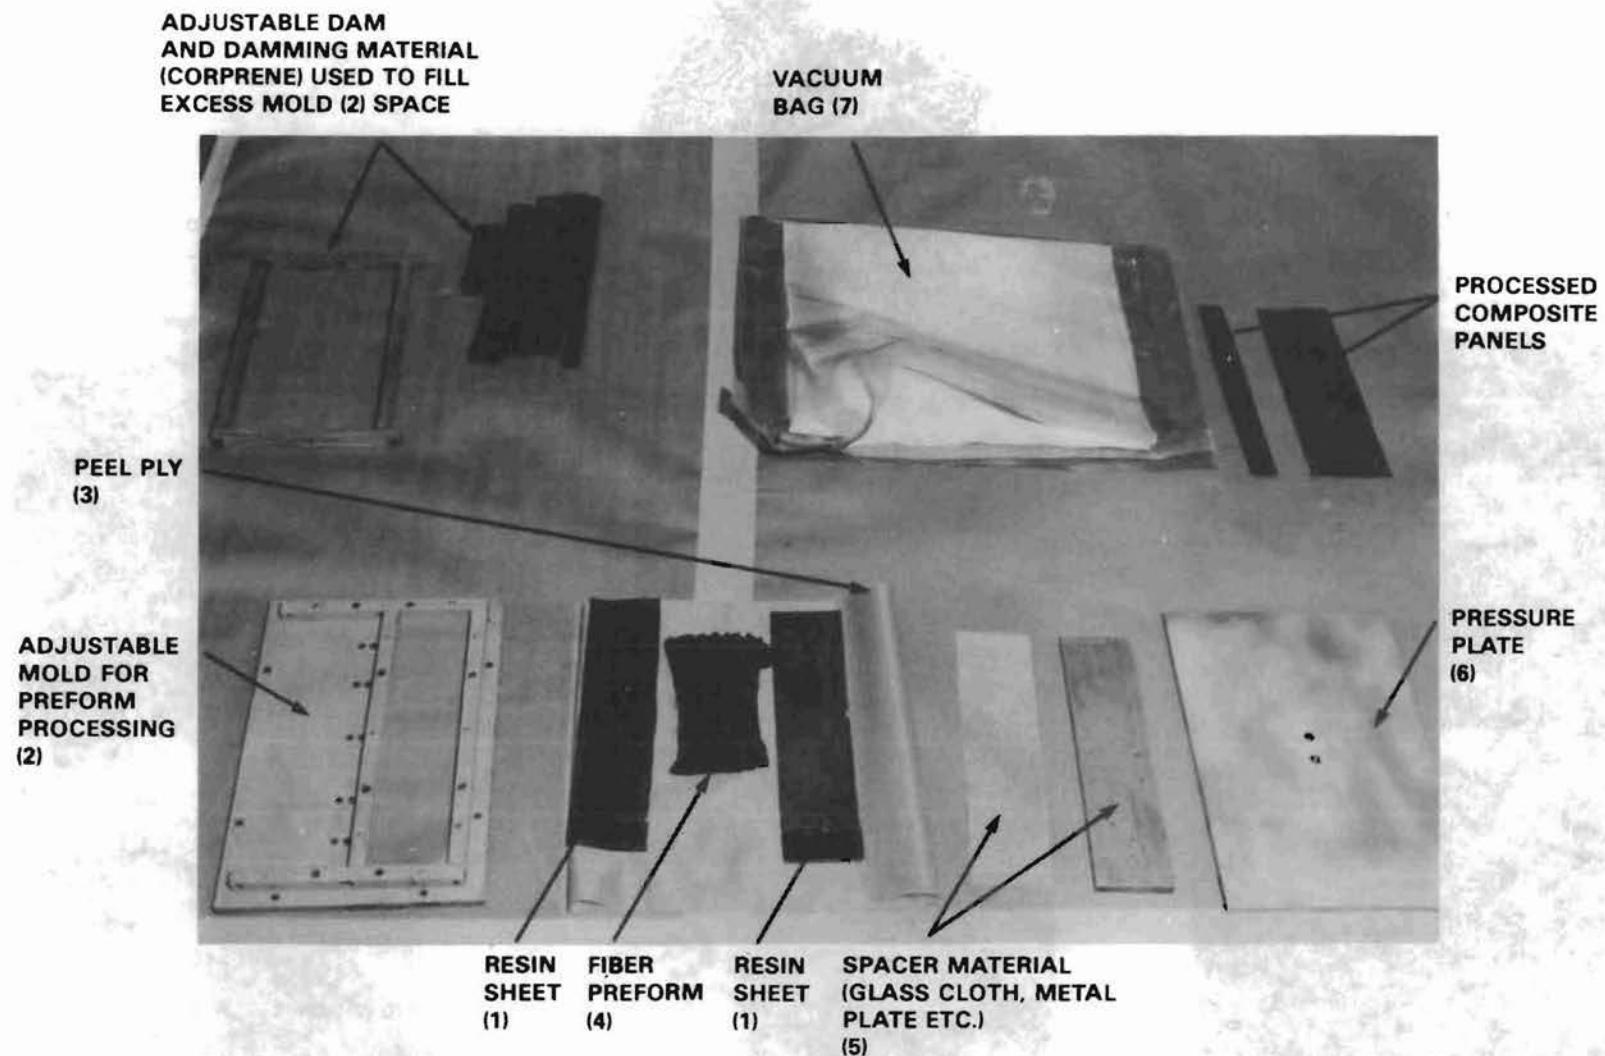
Resin Impregnation Technique for X-D Braided Preforms Using a Resin Precast Sheet and a Closed Mold Termed the Resin Film Lamination Technique
